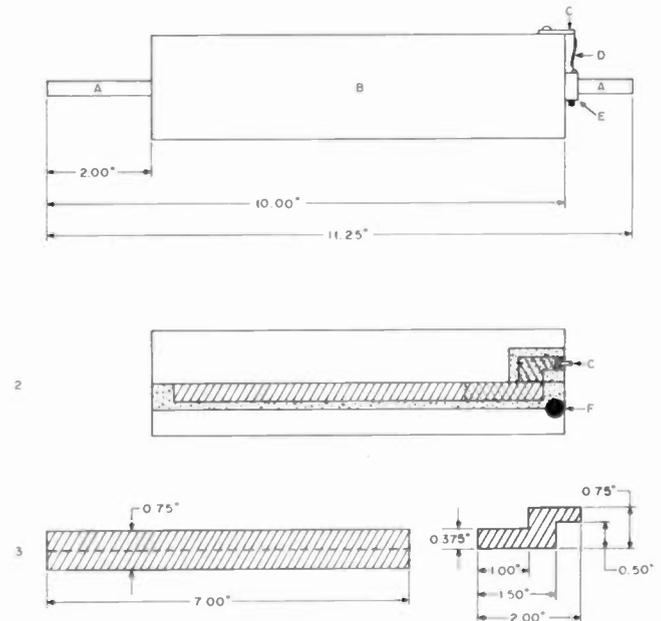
(1) General drum configuration. (A) 1/4" steel shaft. (B) Drum. (C) Small solder lug. (D) Piece of insulated hookup wire soldered to C and E. (E) Brass insert from a 1/4" control knob secured to the drum shaft with its set-screw. (2) Layout of aluminum foil strips (crosshatched) and transparent tape (stippled) on the drum. (F) is the small magnet attached to the drum surface with double-sided adhesive foam tape. (3) Dimensions of aluminum foil strips (see text for assembly).
